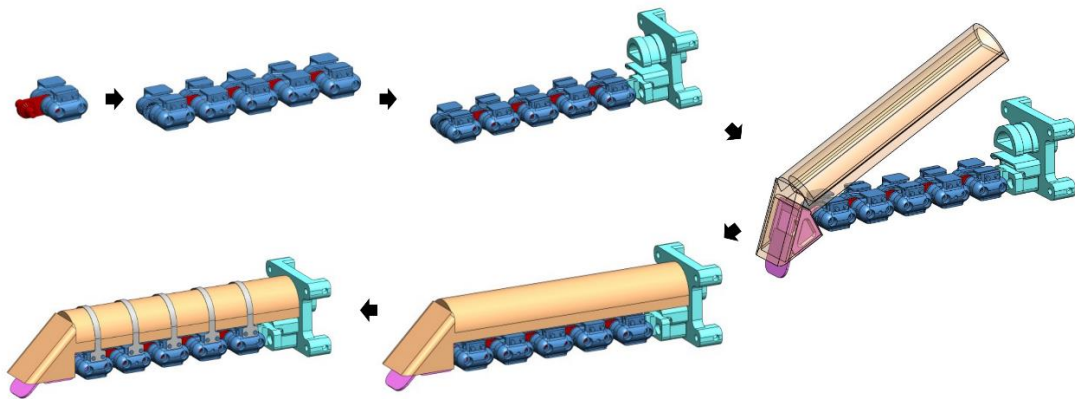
Bioinspired soft finger assembly process step diagram.
